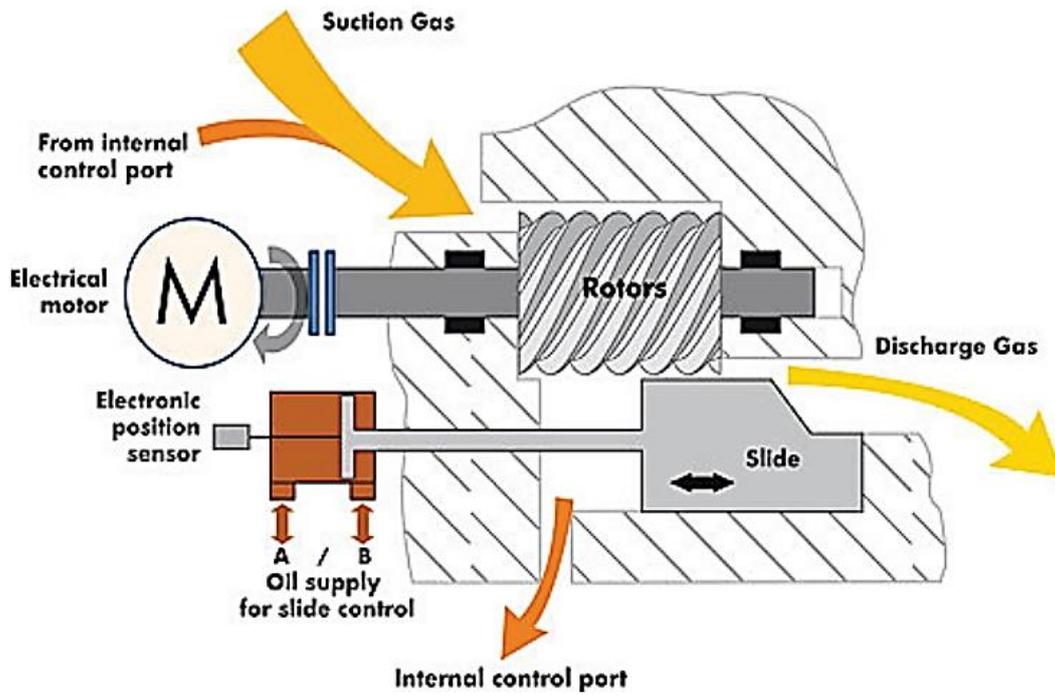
Section of Screw Compressor showing the meshing screws & slide valve
